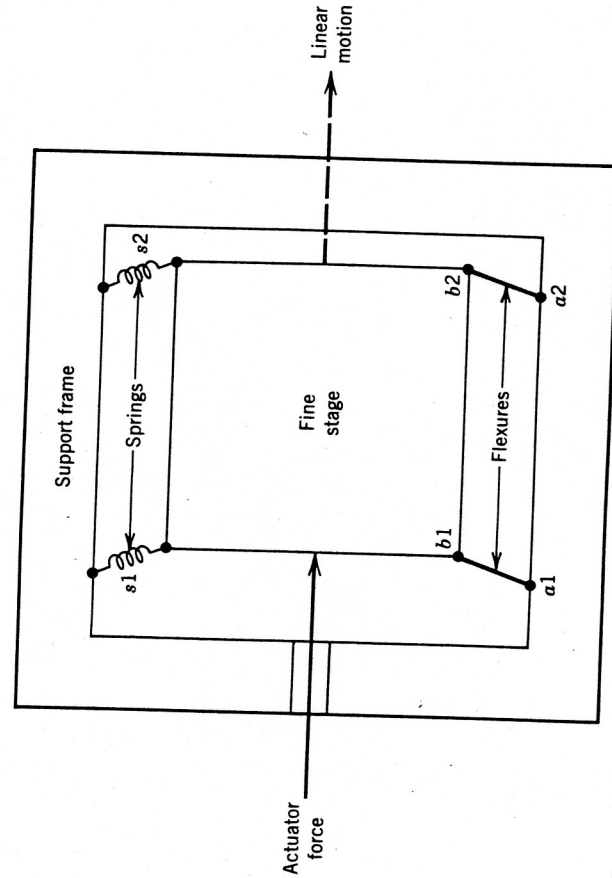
Basic principle of flexure support of fine stage for motion in a single dimension.
